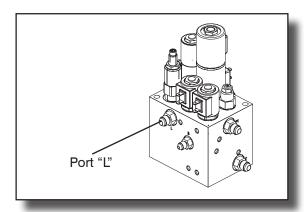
Lift Cylinder Hydraulic Hose Removal
